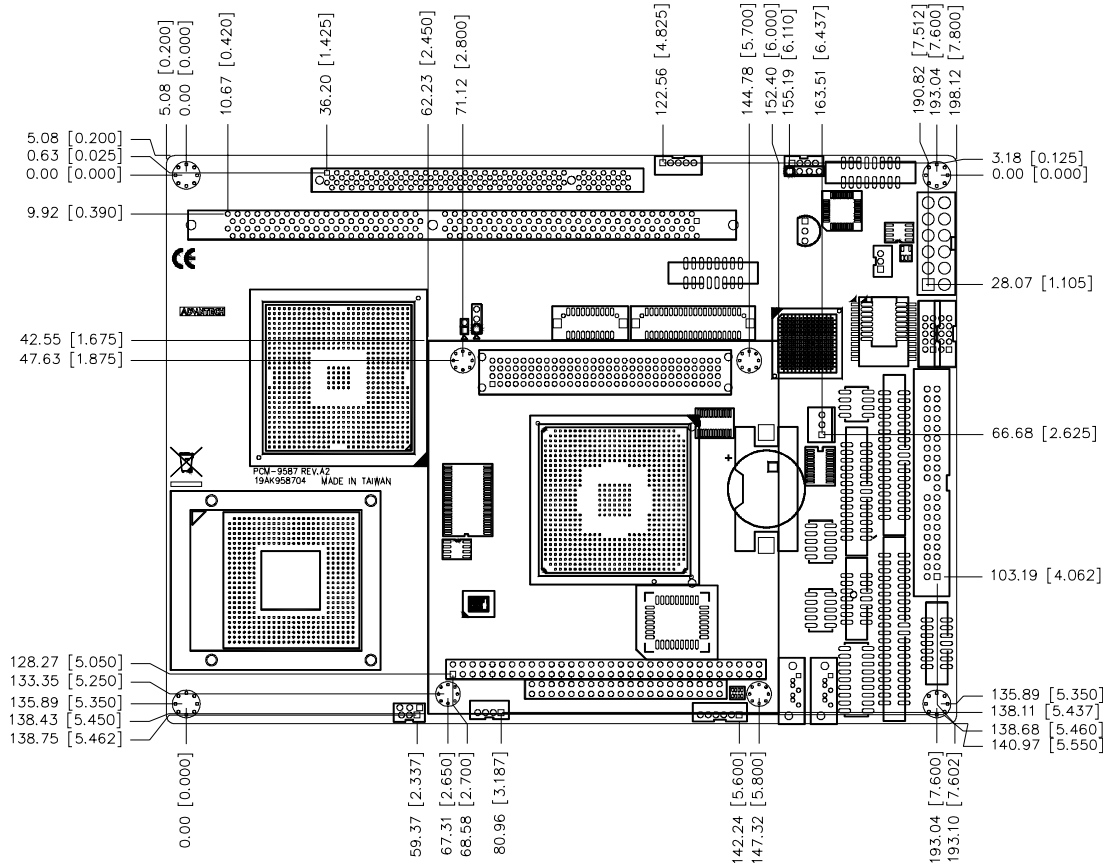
PCM-9587 A2 Mechanical Drawing (component side)
